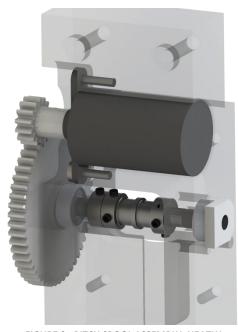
PITCH SPOOL ASSEMBLY: NEATLY INTEGRATED INTO TOOL CHASSIS
